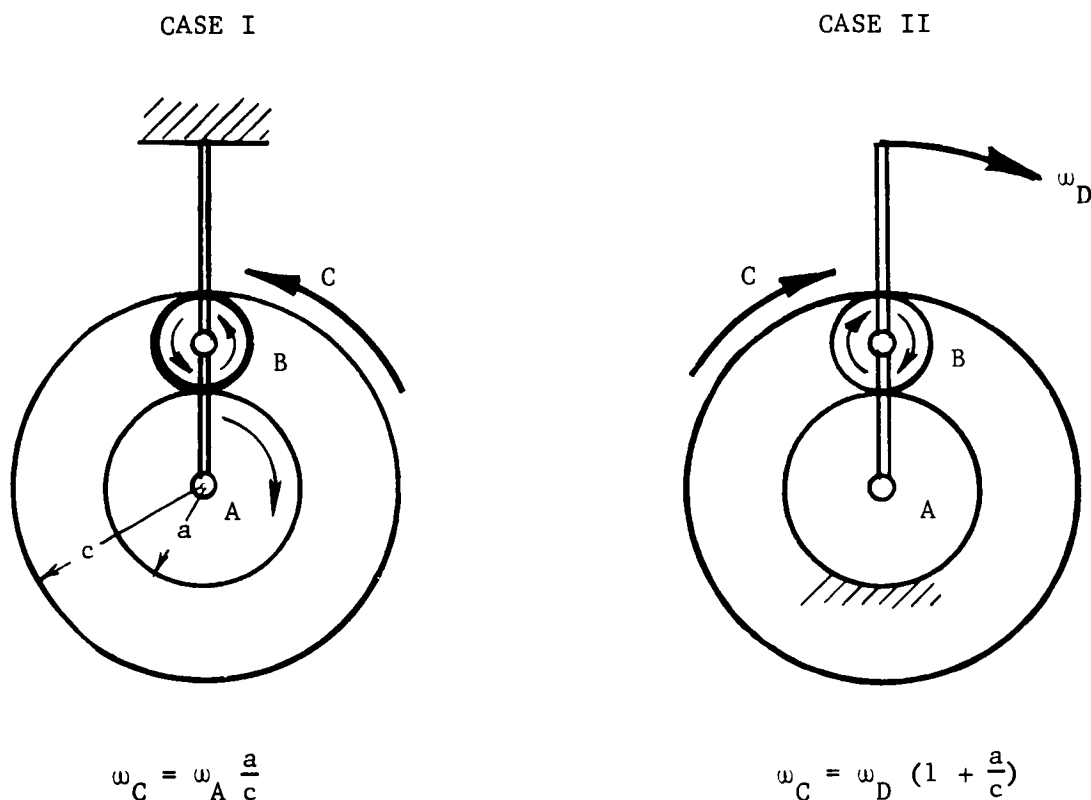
PLANETARY GEAR SCHEMATIC.
